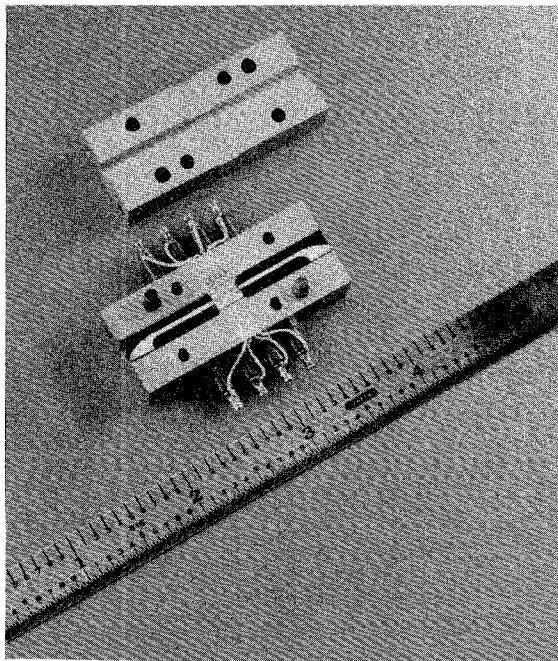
Test Fixture for the 4/5 Bit Phase Shifter.
